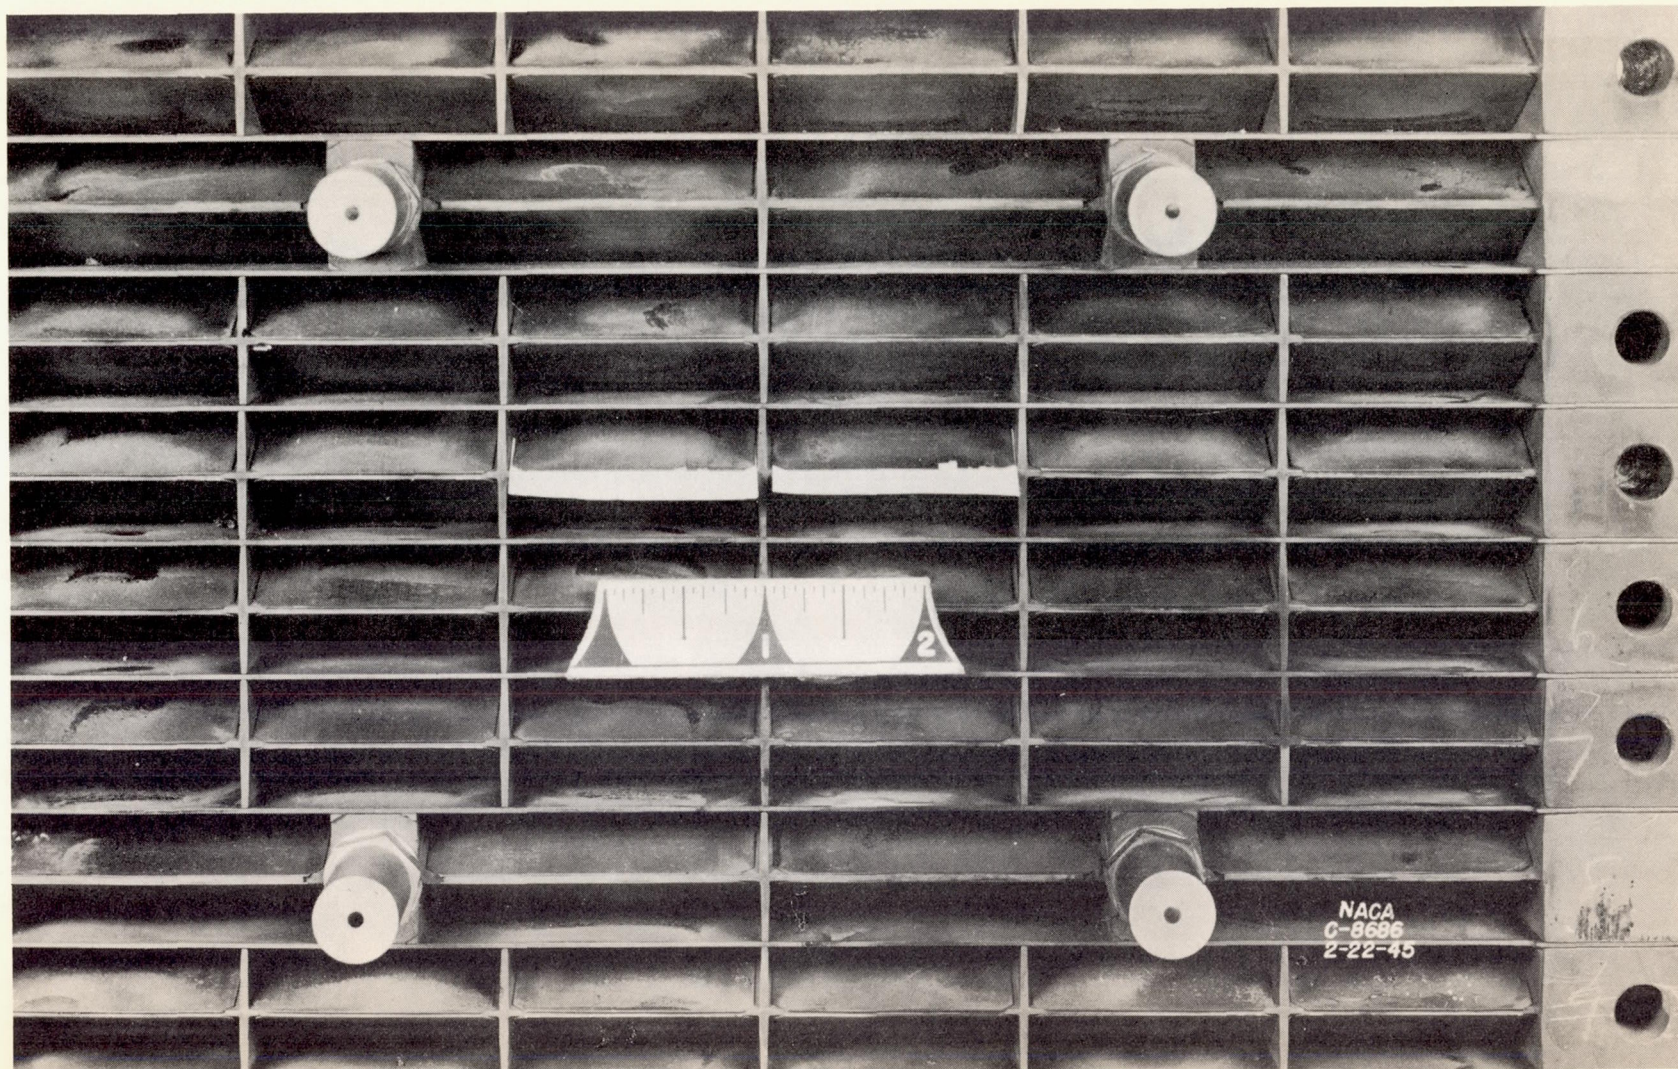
Close-up view of flapper-valve grid assembly showing two of the most damaged valves after 30 minutes of operation.
